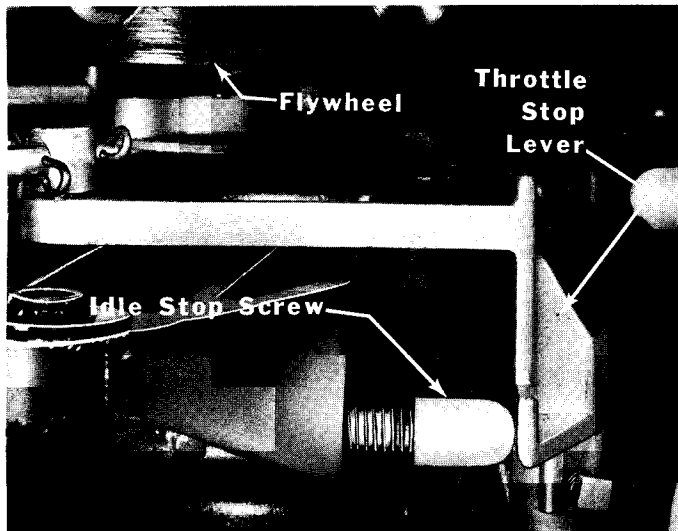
Throttle Stop Lever Touching Idle Stop Screw
